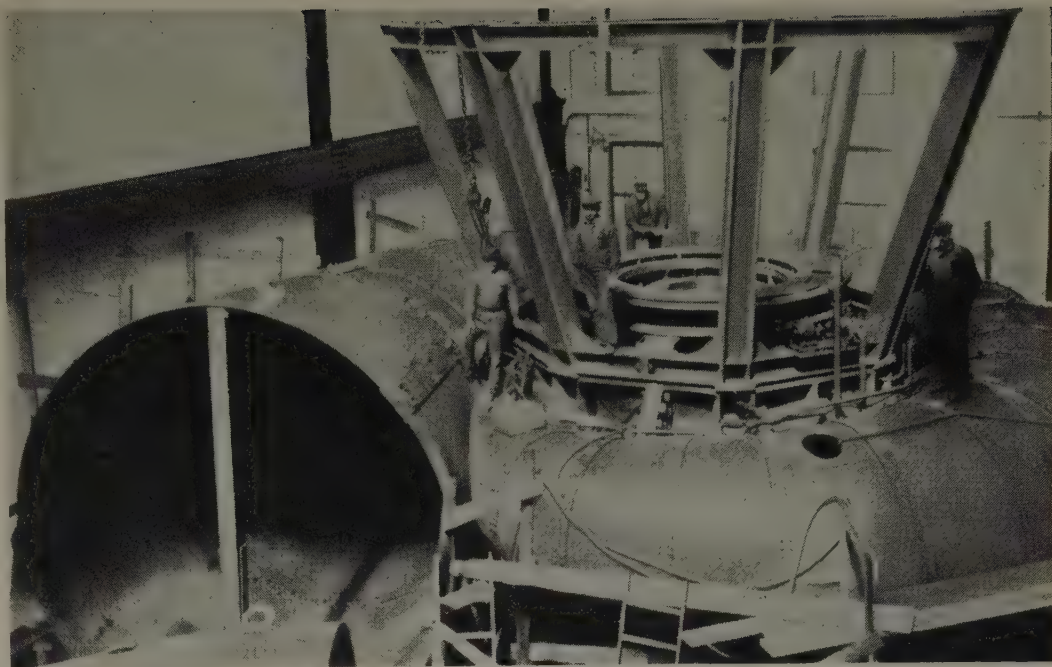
Shop view of Krångede water wheel showing structural steel frame used to transfer loads due to generator and hydraulic thrust to foundations
